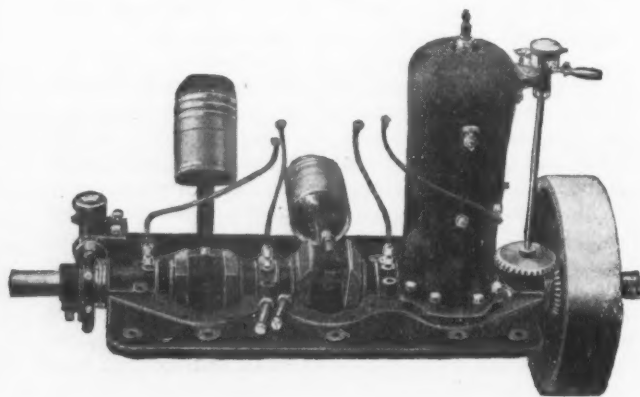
Parts of a Three-Cylinder Engine, Showing the Self-Contained Construction.
